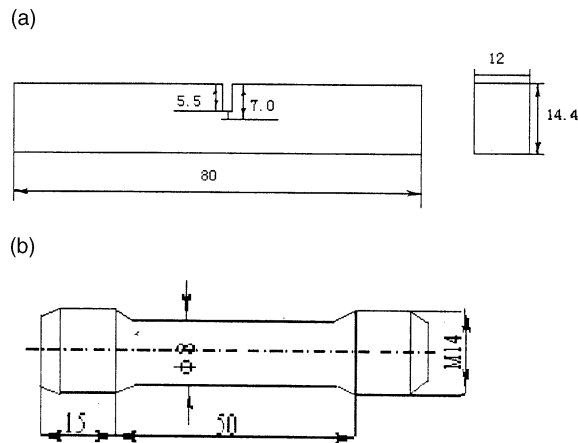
Dimensions of (a) COD specimens, and (b) tensile test specimens.
